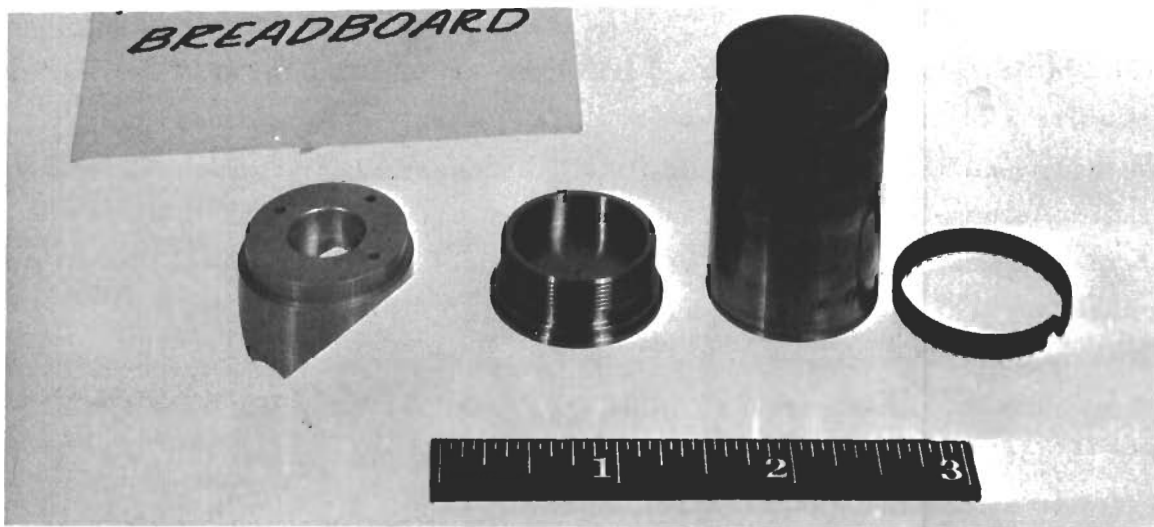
Hot displacer parts in unit X447525-100 (HAC photo 4R02914)
